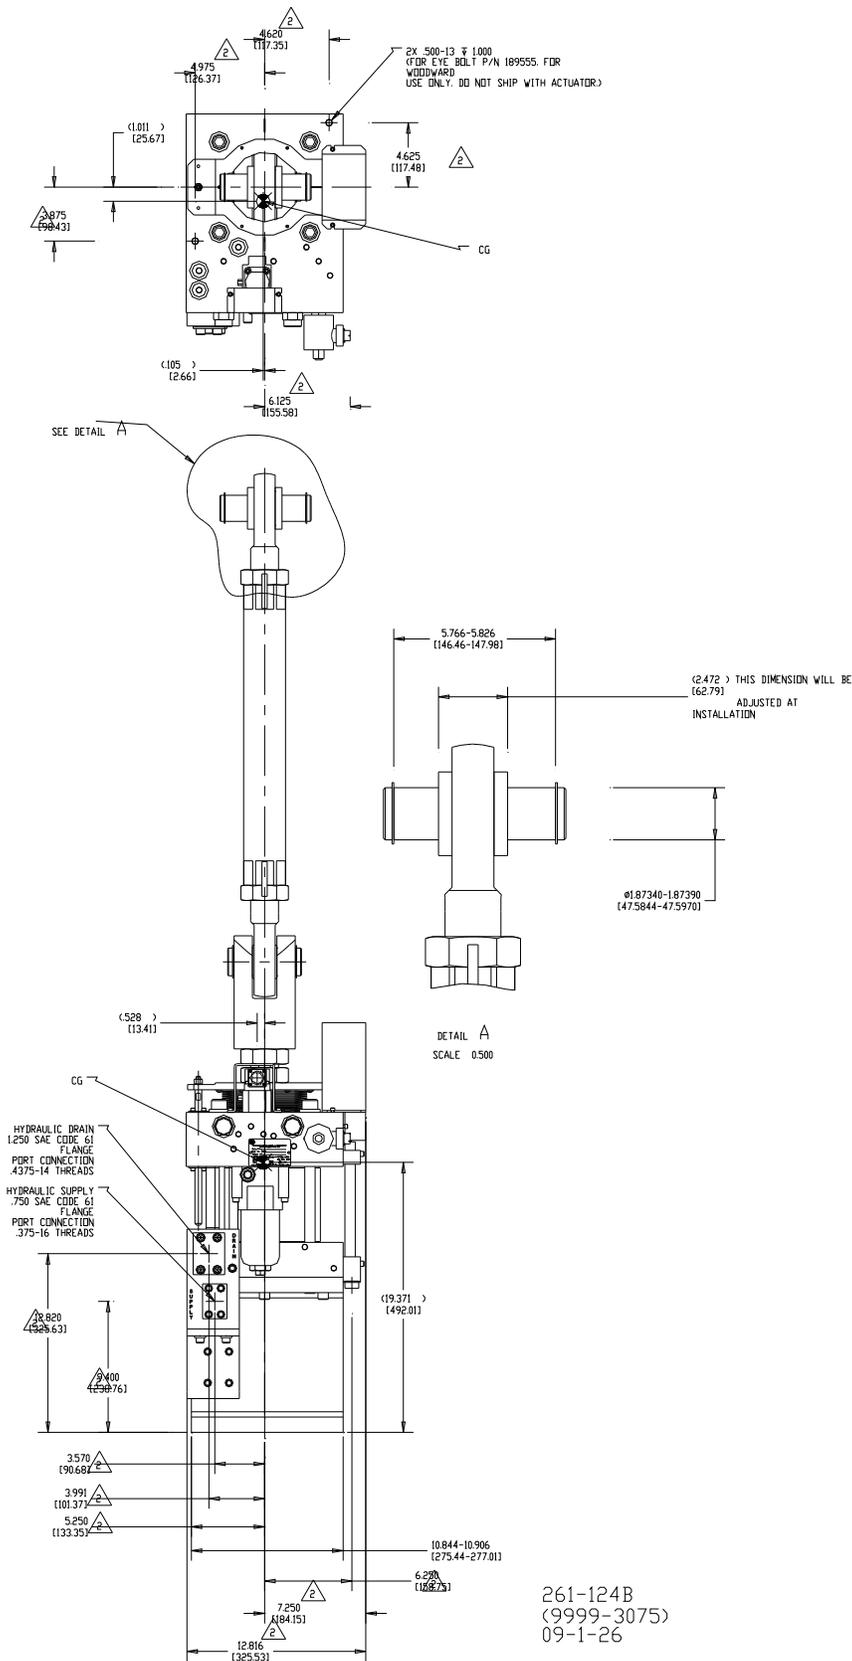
9F IGV Actuator with Electric Trip and SAE CODE 61 flange type connection (front and top views)
